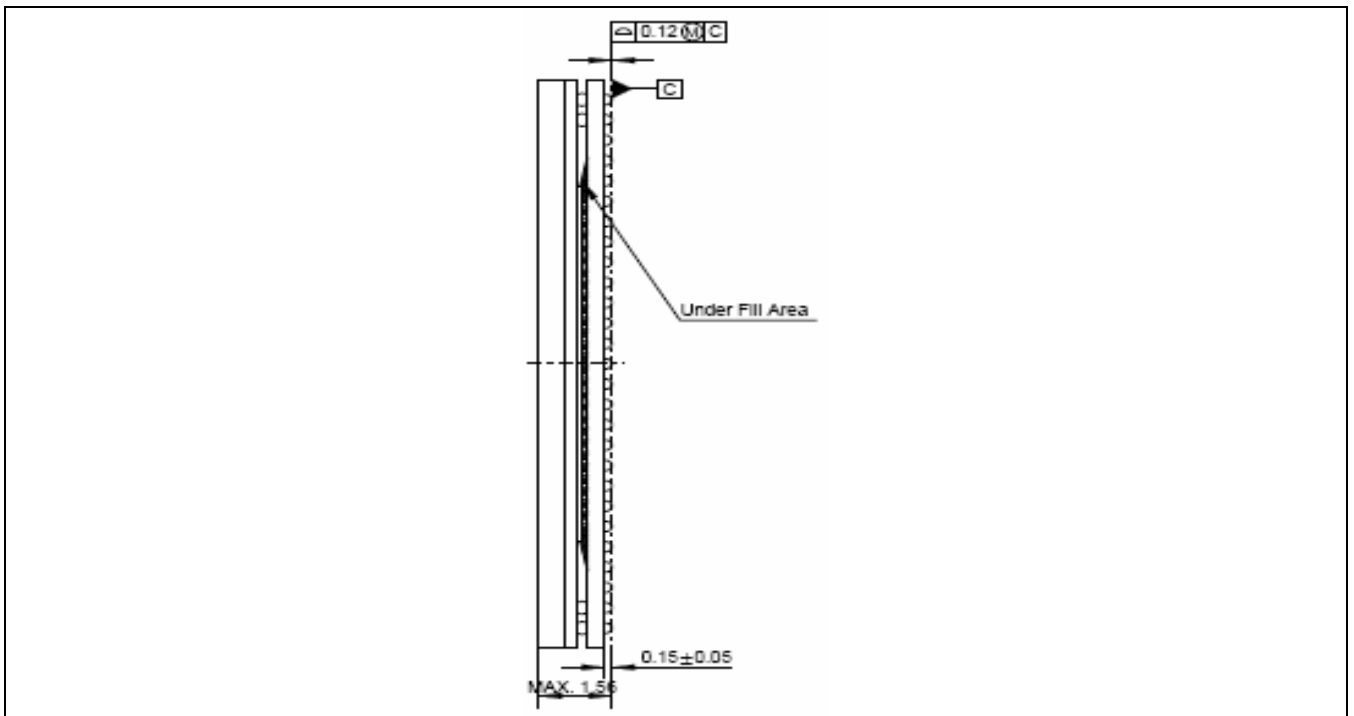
2 S5PC100 Package Dimension (580-FCFBGA) – Side View
